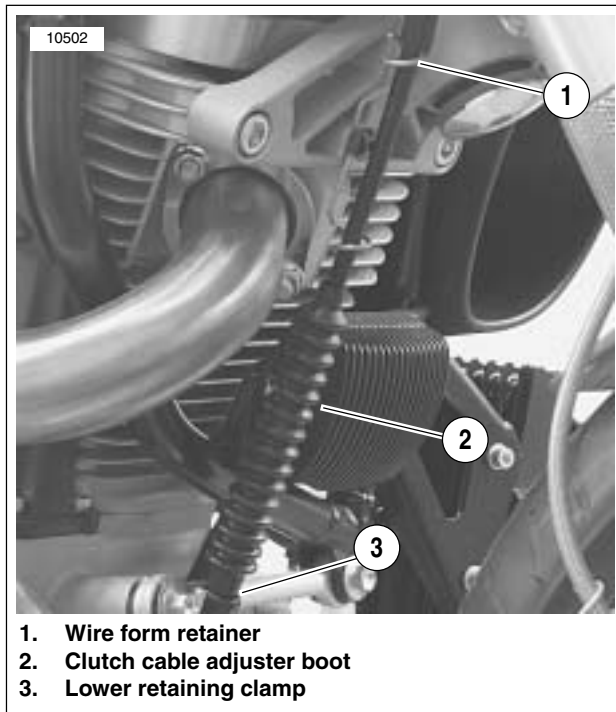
Clutch Cable Wire Form Retainer, Retaining Clamp and Adjuster Boot
